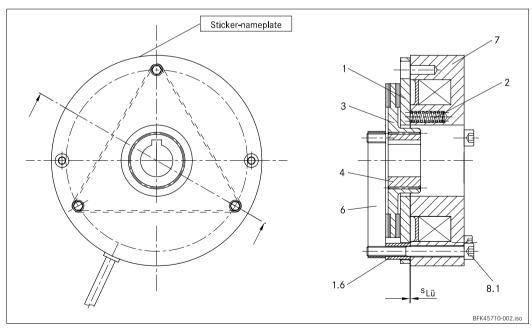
Spring-applied brake BFK457-06...16 Basic, stator complete with rotor
